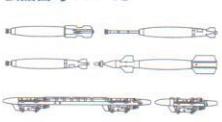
DETAIL-UP PARTS NOT INCLUDED, SOLD SEPARATELY
